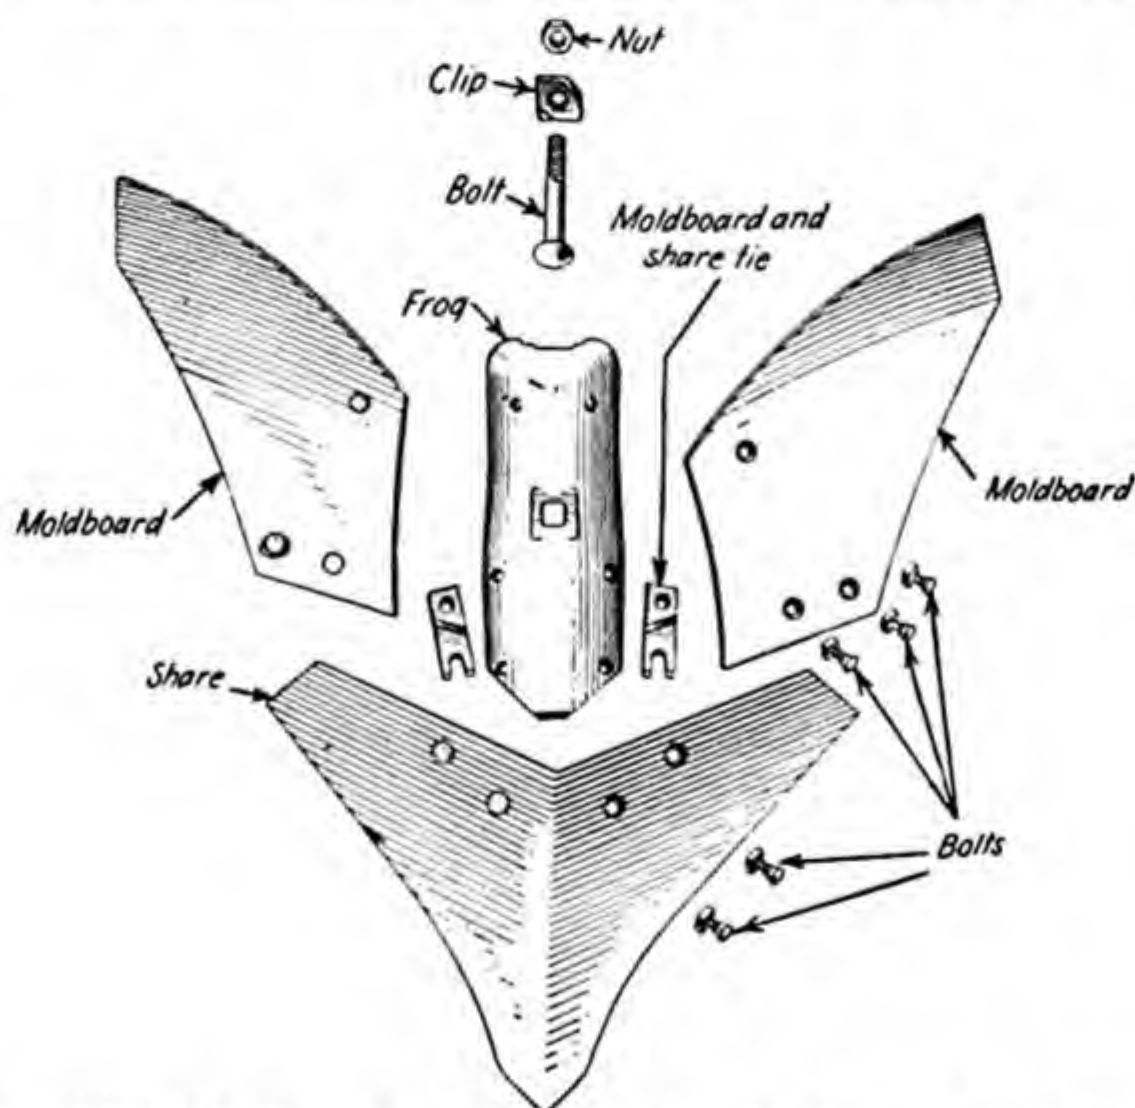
Exploded view of middlebreaker bottom and parts.
